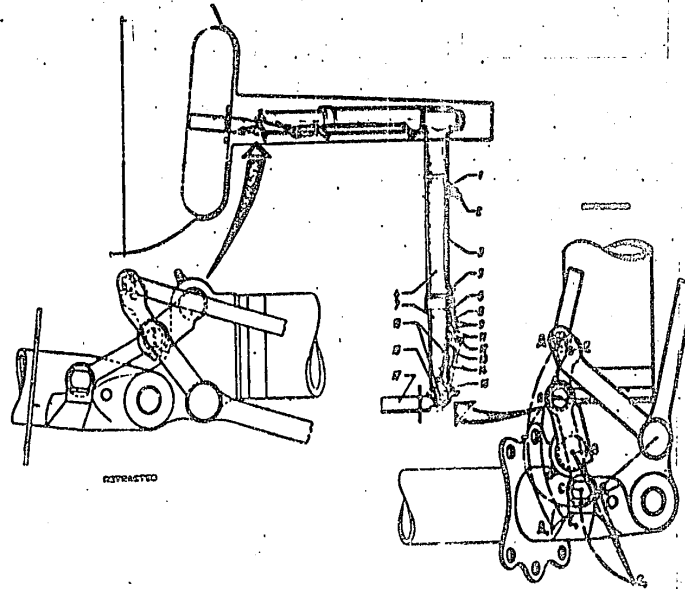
L. G. HAND CRANK WHEEL TURNING MECHANISM
